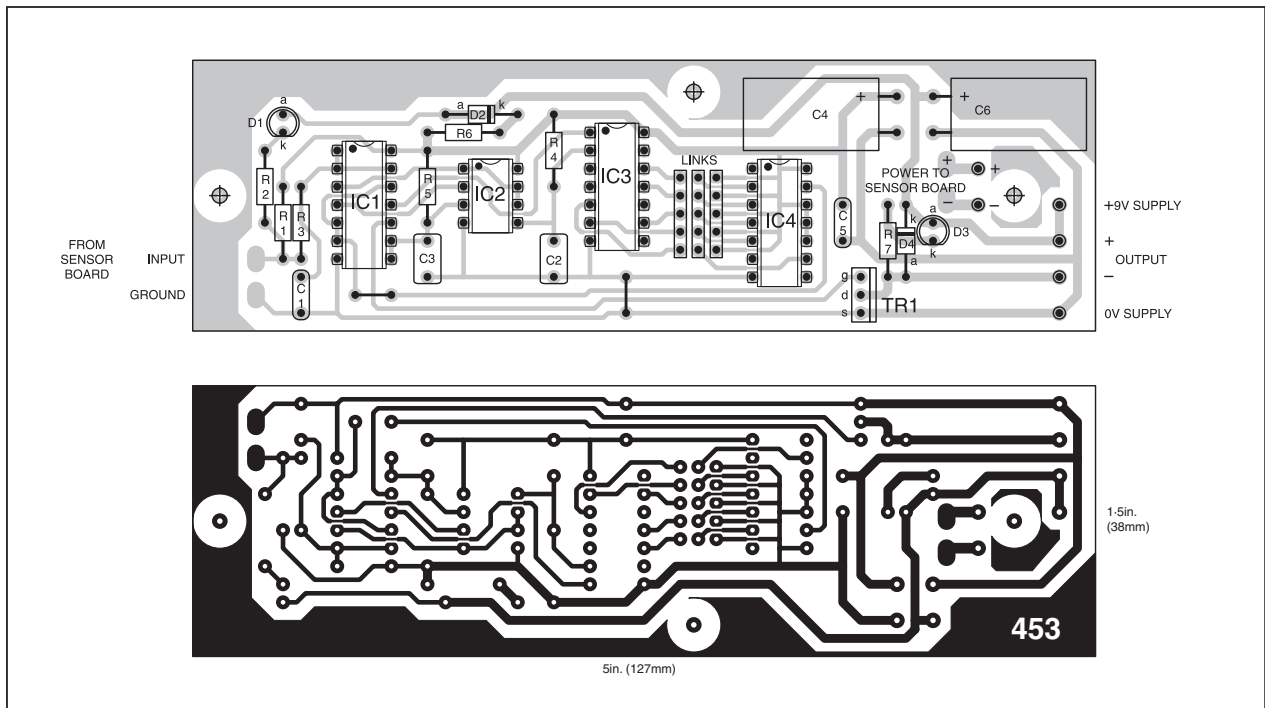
Pulse Counter printed circuit board component layout and full-size underside copper foil track master pattern for the Portable Mini Alarm. The completed Pulse Counter board is shown below bolted to the Sensor p.c.b.
